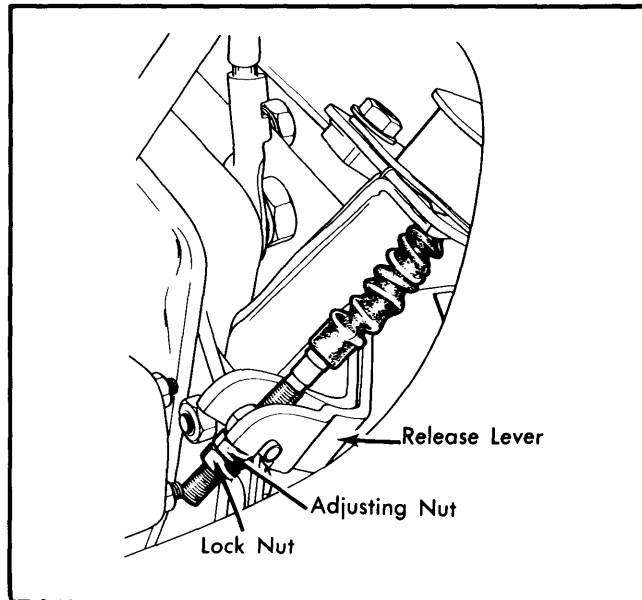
Adjustment Point for Clutch Cable (R-17 Shown)
